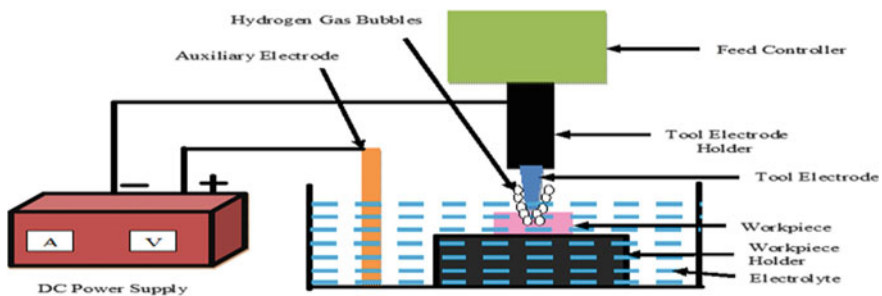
Schematic sketch of electrochemical discharge machining (ECDM) process
